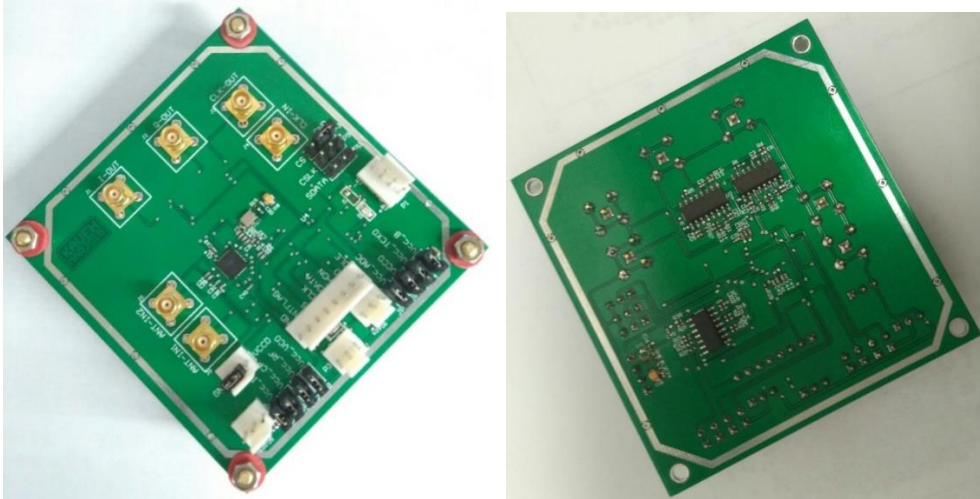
Fabricated Board of Front-end Receiver (Top and Bottom Layer)
